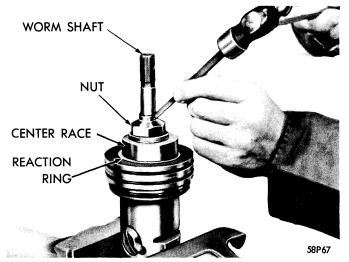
Locking Worm Shaft Bearing Adjusting Nut
